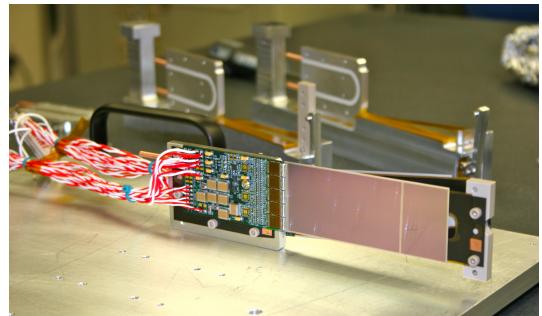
A prototype module assembly (foreground) with the 50 mrad (left) and 100 mrad (right) module assembly fixtures in the background. A pair of cooling blocks and a spacer block can be seen on the fixtures.
